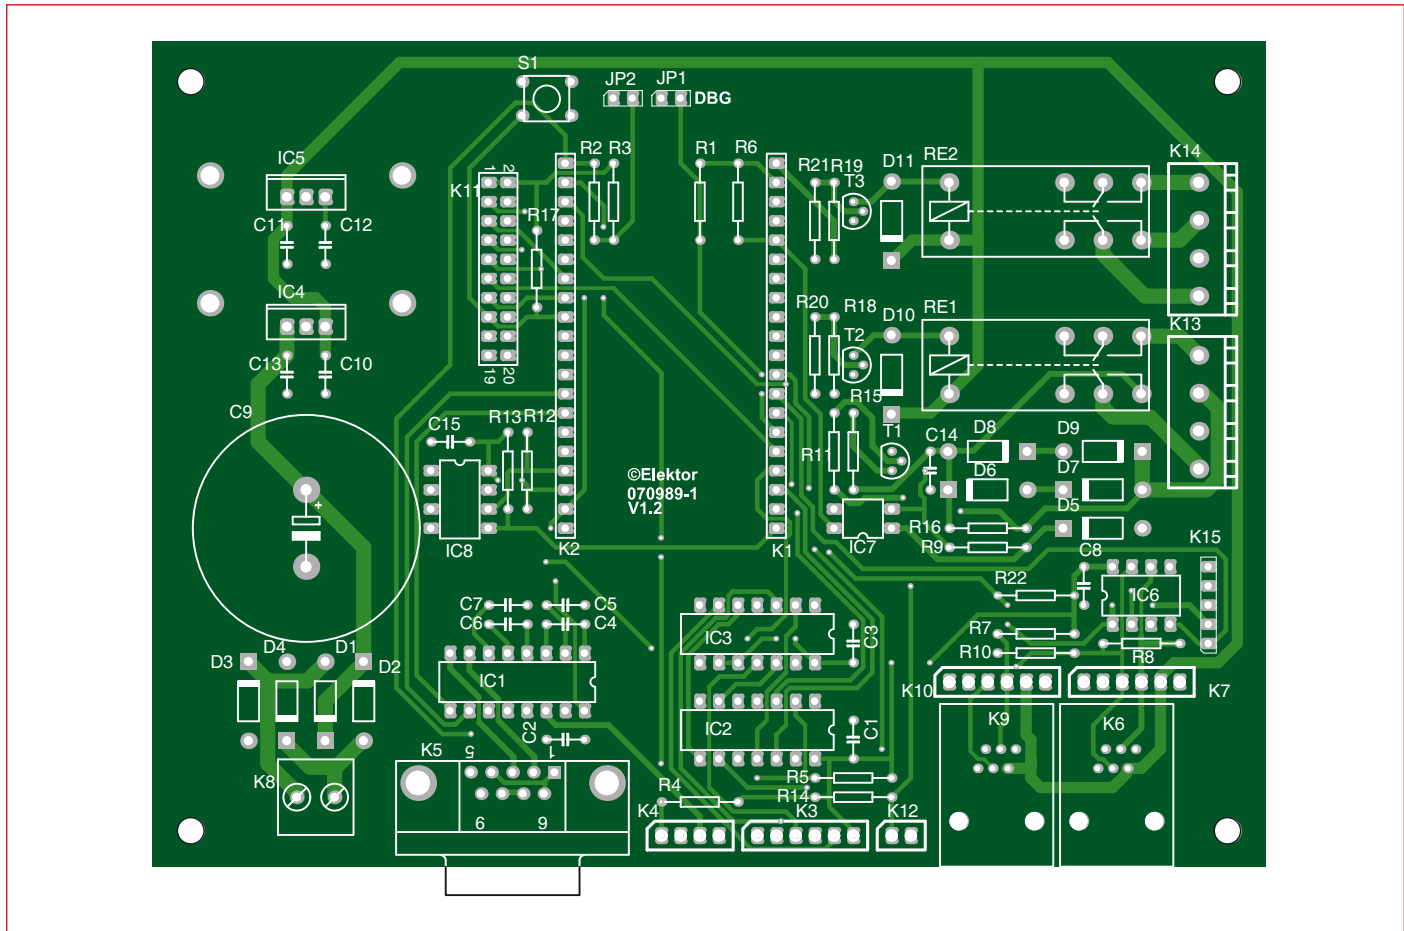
The PCB is designed with a spacious layout to make assembly easy.
